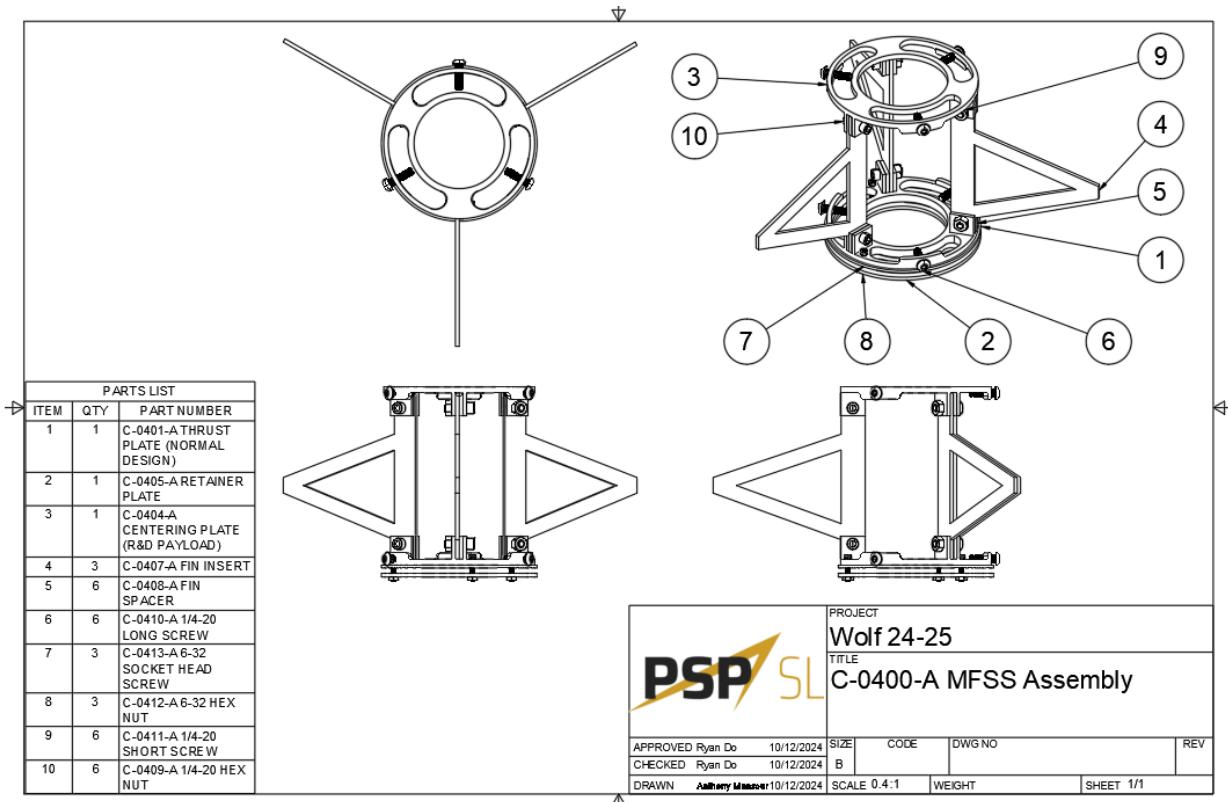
MFSS Assembly Technical Drawing (Sheet 1)
